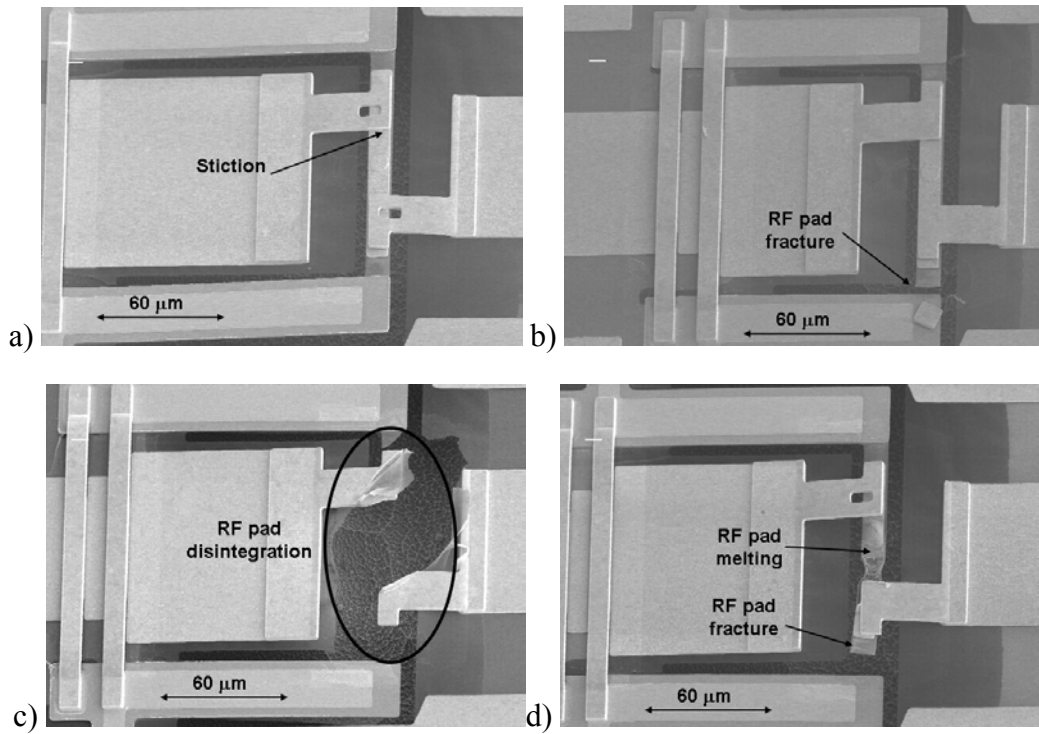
SEM images of the failures observed for Au contact dimples: a) stiction, RF pad fracture, RF pad disintegration, RF pad fracture and melting of the gold on the RF pad.
